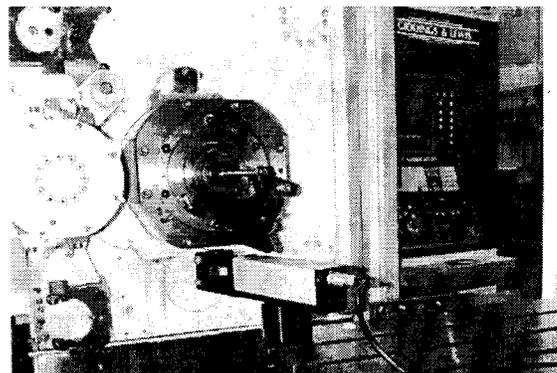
Photo of the Giddings and Lewis RAM 630 machining center with the laser head mounted on the pallet and the flat-mirror target in the spindle.
